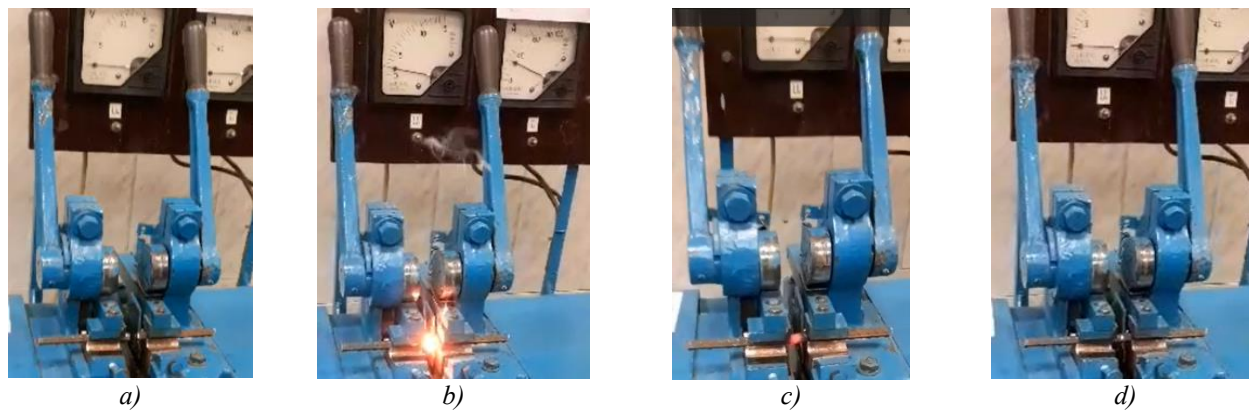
The process of resistance butt welding of samples: *a* – preparation for welding; *b* - butt welding process; *c,d* – cooling process.
